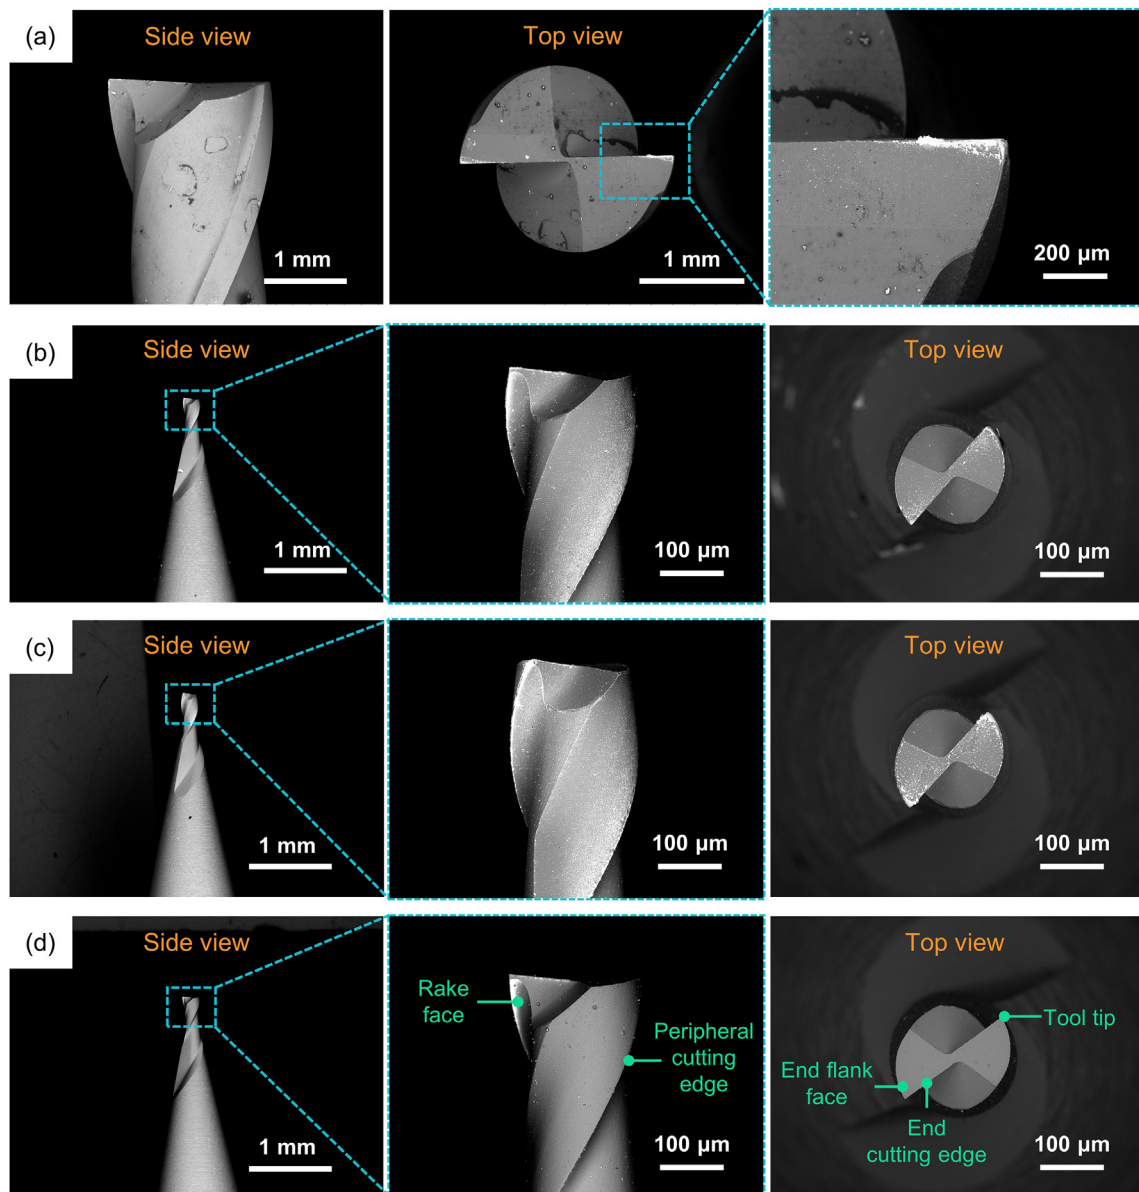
SEM images of the milling tools after machining experiments. (a) milling tool after machining the mirror surface, (b) milling tool after machining the micro-groove array, (c) milling tool after machining the micro-pillar array, and (d) new milling tool.
